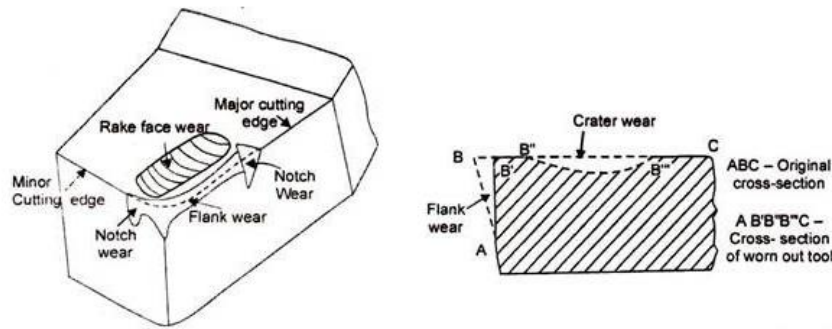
a. Tool wear phenomena, b. Flank and crater wear
